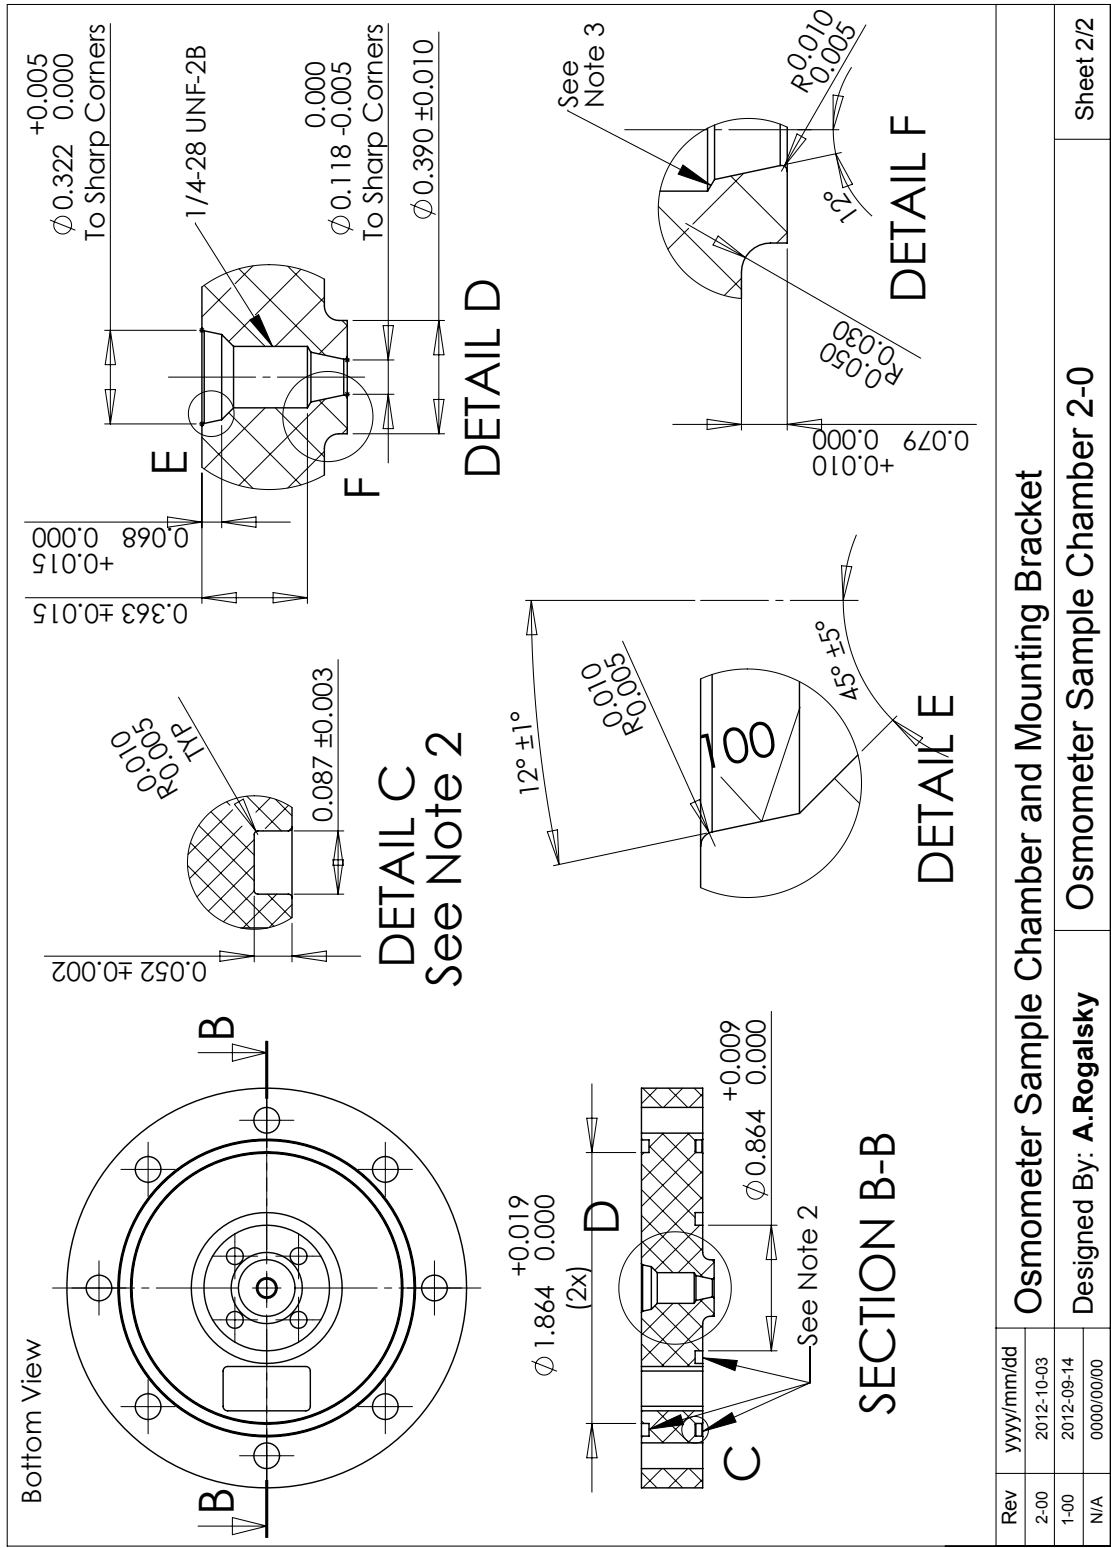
Transducer Osmometer Core Assembly / Sample Chamber / Sheet 2
